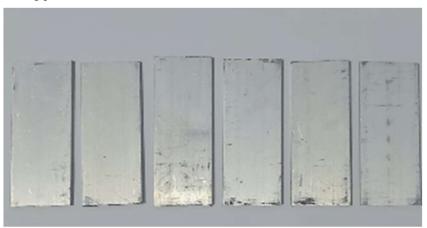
Al6061 plate with dimensions 100x40x4 mm
